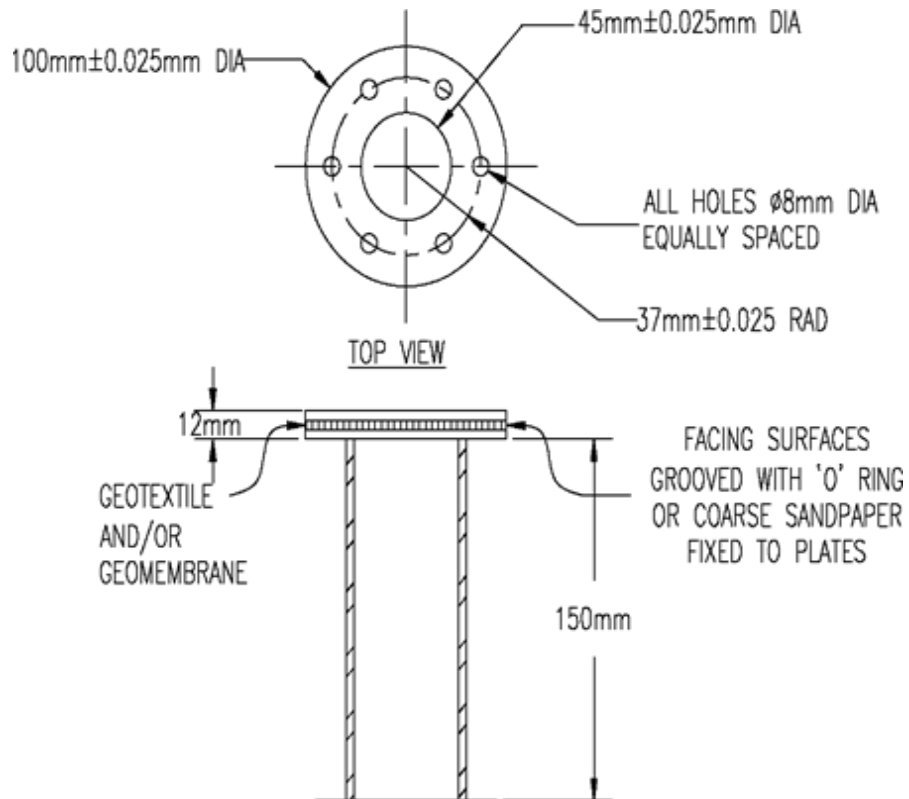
TEST FIXTURE DETAIL (NOT TO SCALE)
